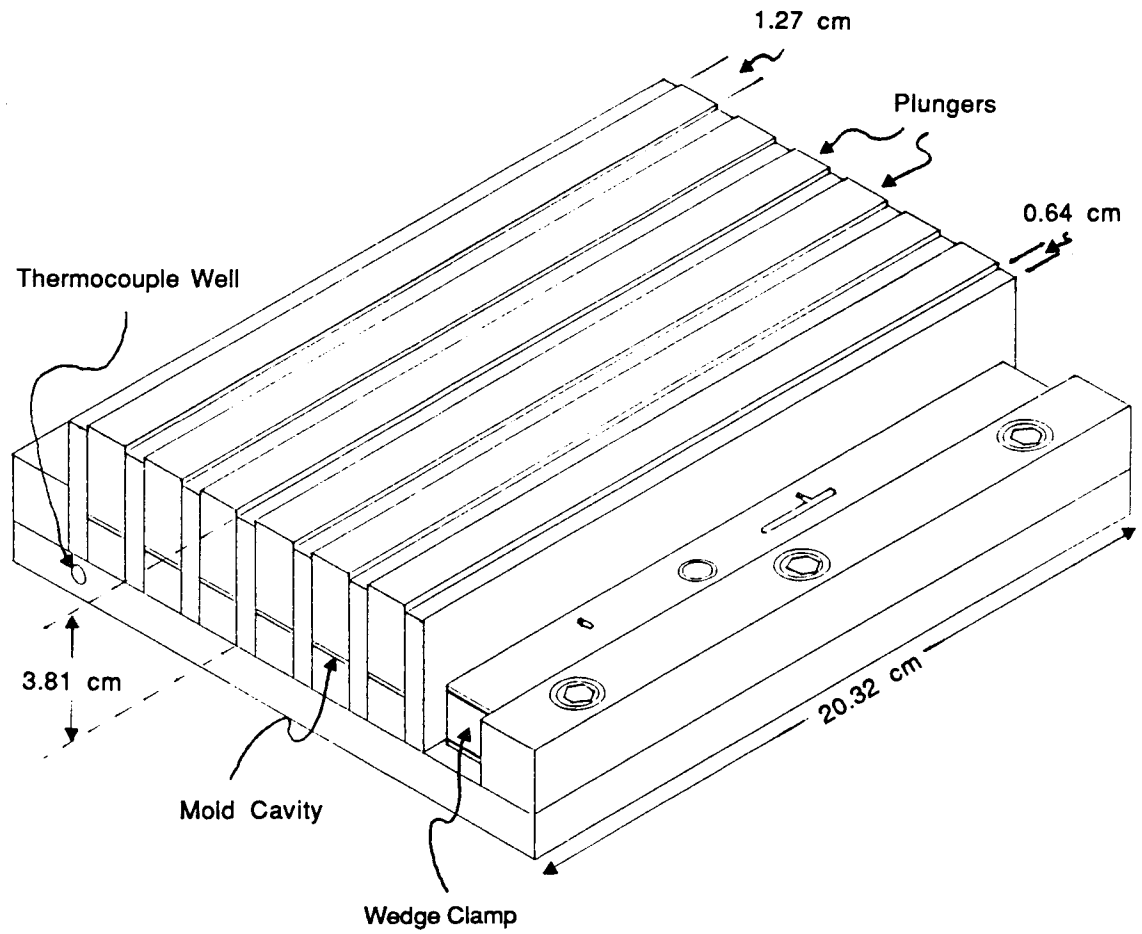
Mold Used to Produce Composite Specimens from Prepreg
